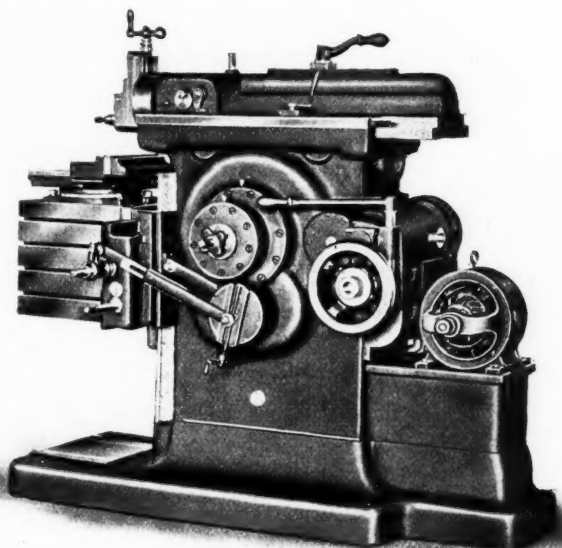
Stockbridge Shaper, arranged for Motor Drive.
